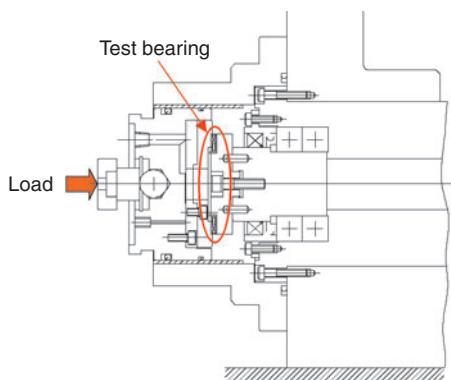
Diagrammatic illustration of NTN horizontal type thrust bearing test rig
